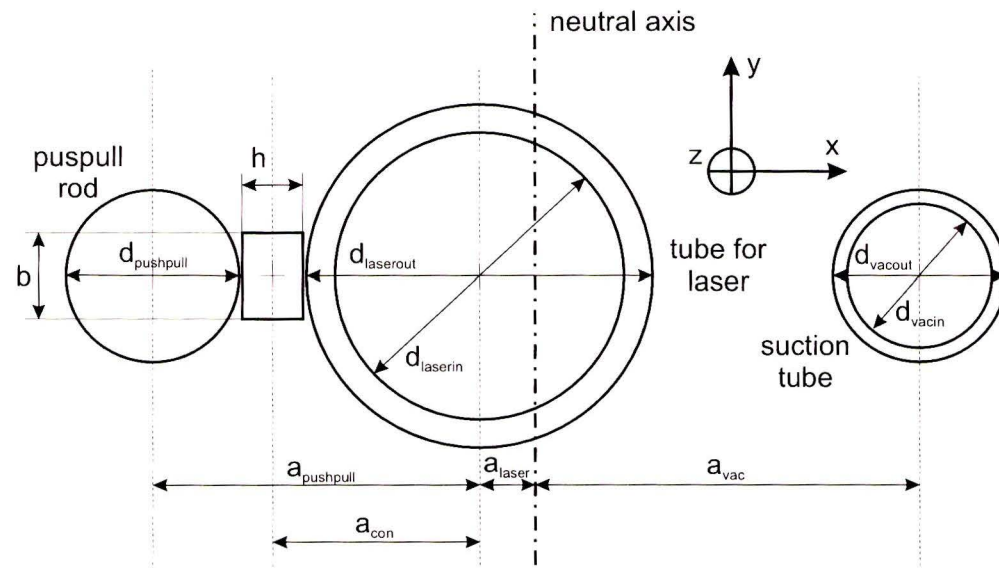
Schematic cross-section of the laser cutting tool shaft
